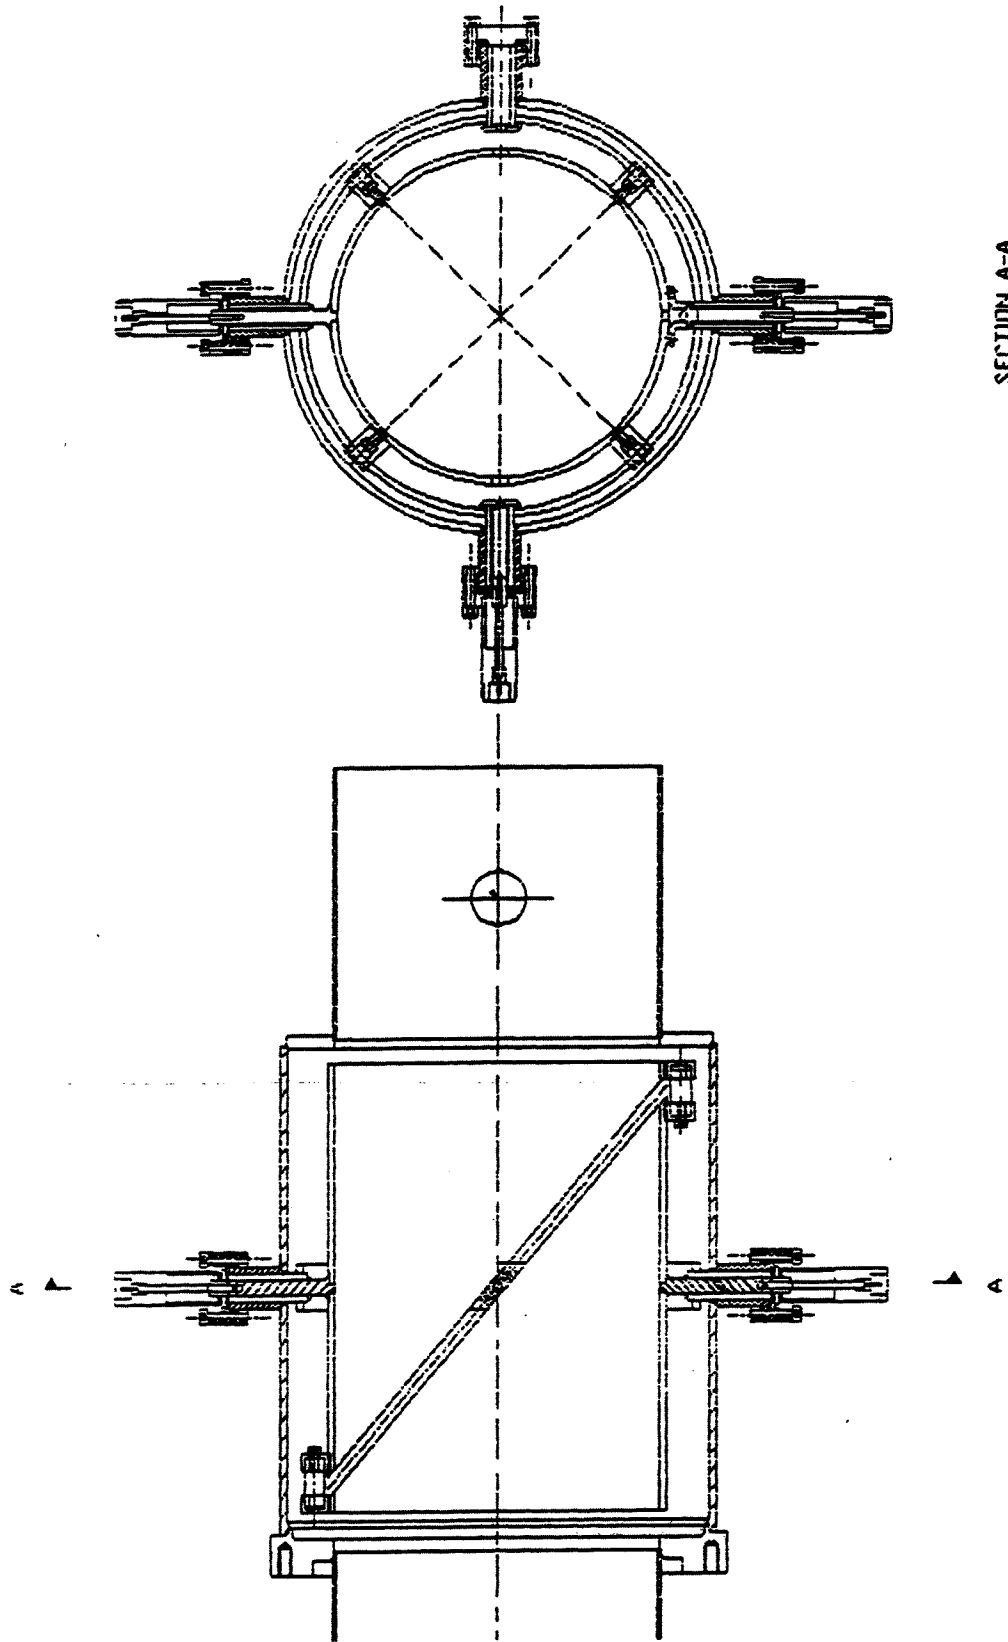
3 One of the prototype PUE detector/vacuum housing designs
